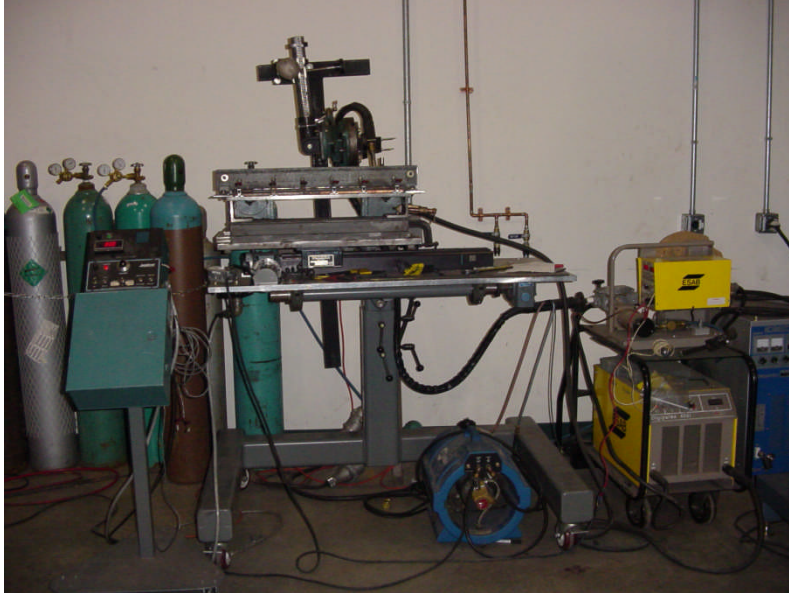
Equipment Set-up for High-Speed GMAW-P Welding Trials to Establish Humping Limits
